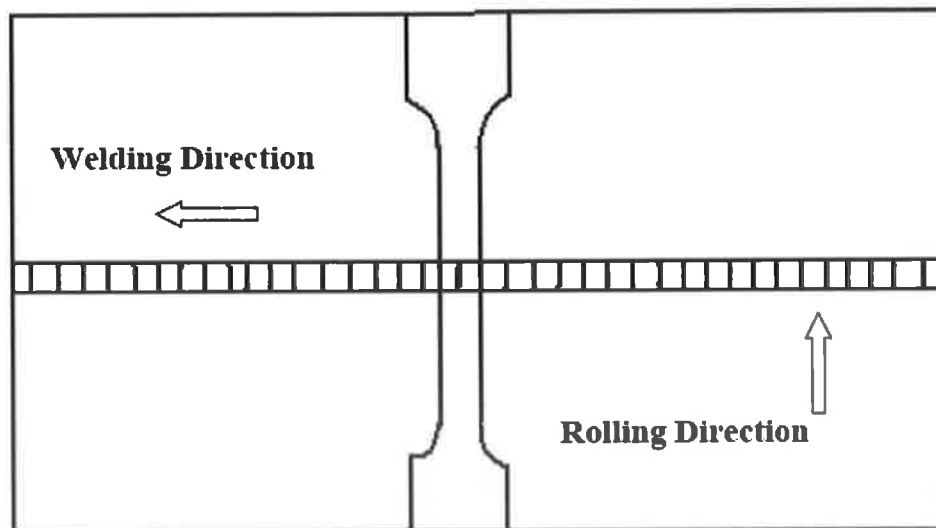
Schematic diagrams of welding direction and testing specimen orientation.
